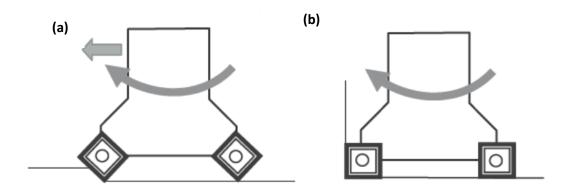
Milling types (a) face milling (b) shoulder milling (Source: [21])
